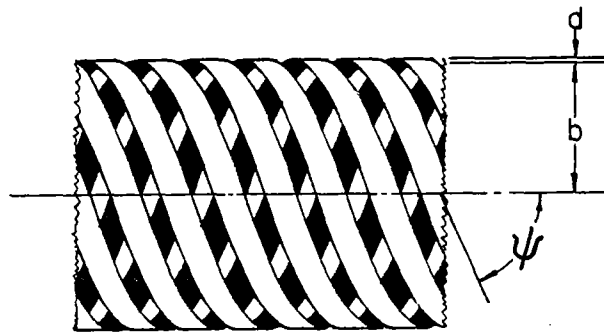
Tape-wound helical shield geometry. The shield shown is 6-filar.
